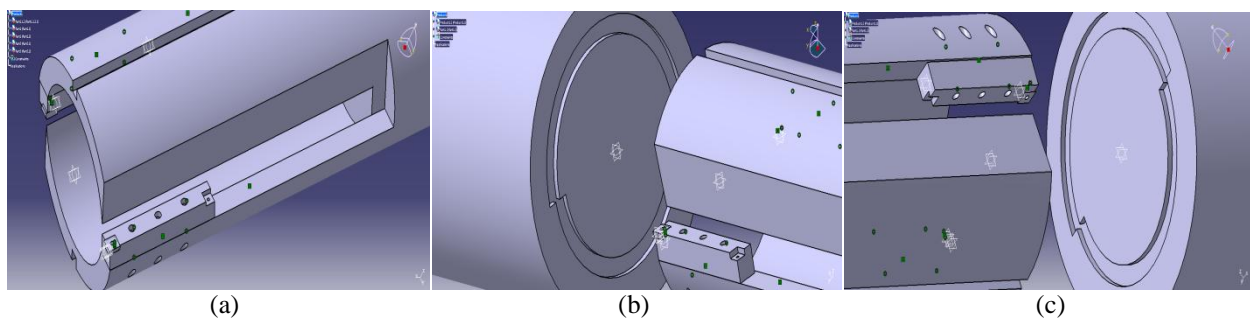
(a) Cutting tip arrangement on trepanning tool (b) Material removal from outer periphery of core (c) Material removal from inner periphery of core.
